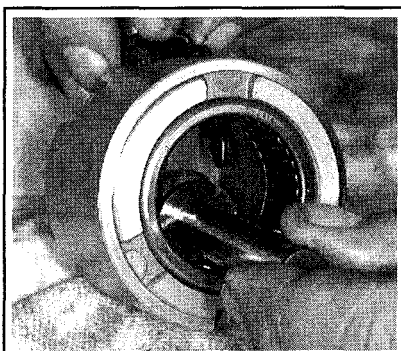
Push downward on the detent lever and remove the shift shaft with cradle
